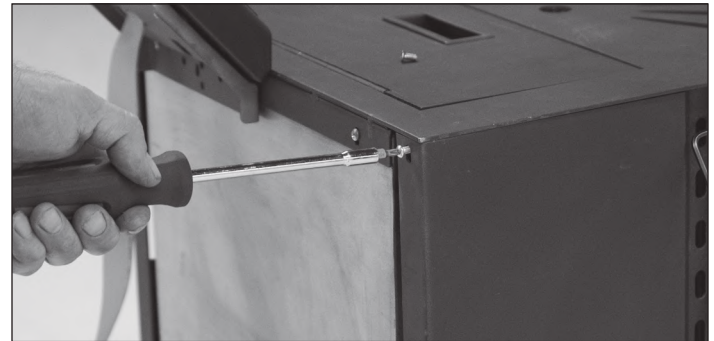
Remove (2) screws from rear of side panel, at the top and bottom of the panel. Remove (2) screws from the front face of the side panel, at the top and bottom of the panel.
